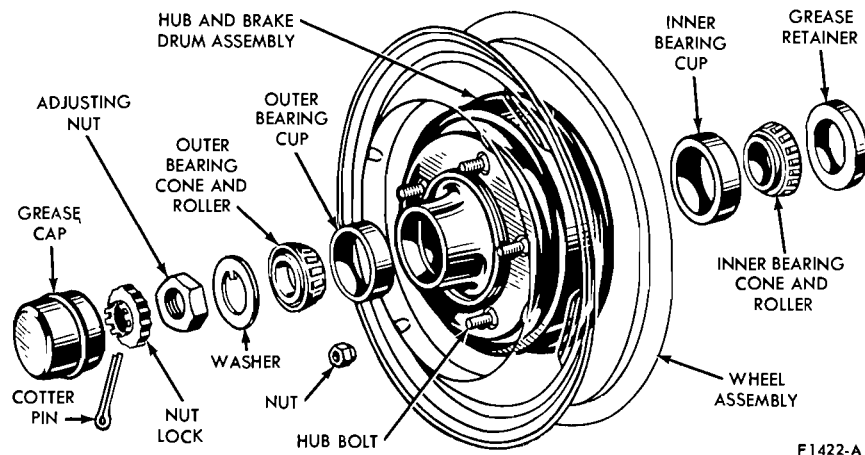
Front Hub, Bearing and Grease Retainer Drum Brakes
